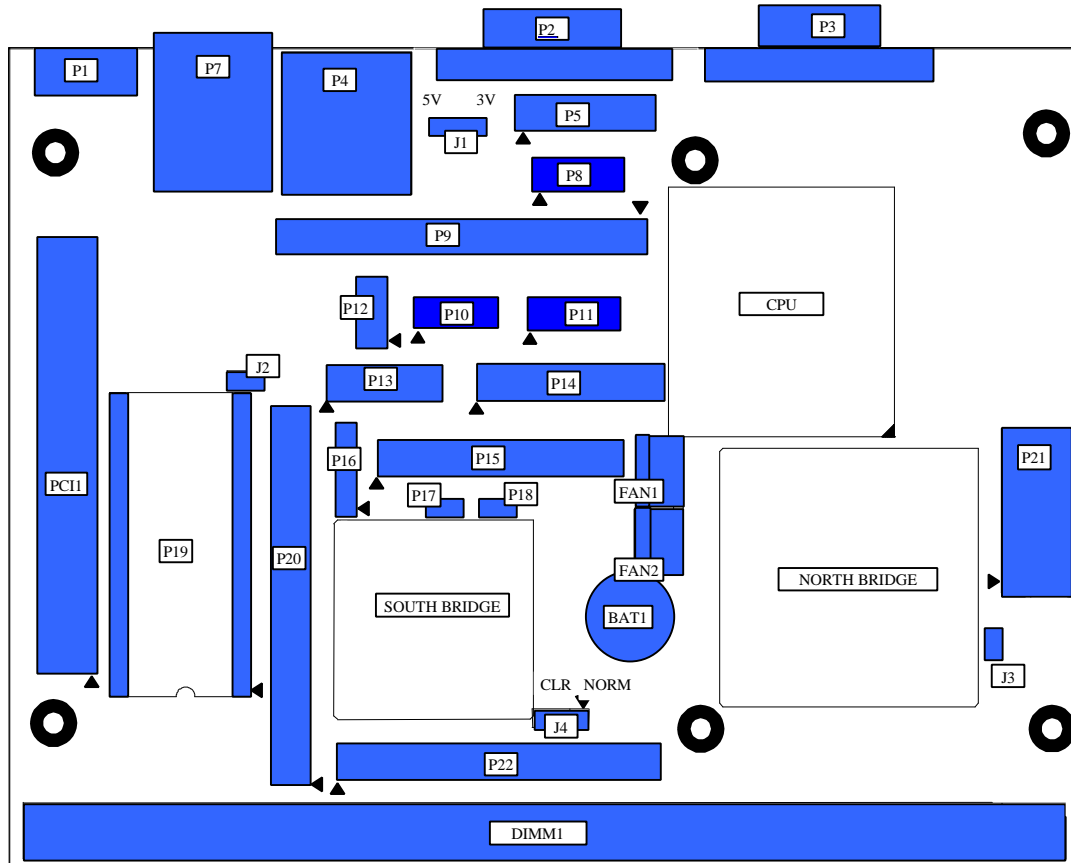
MAGNUM PCB - Top View Showing Connector Positions.
